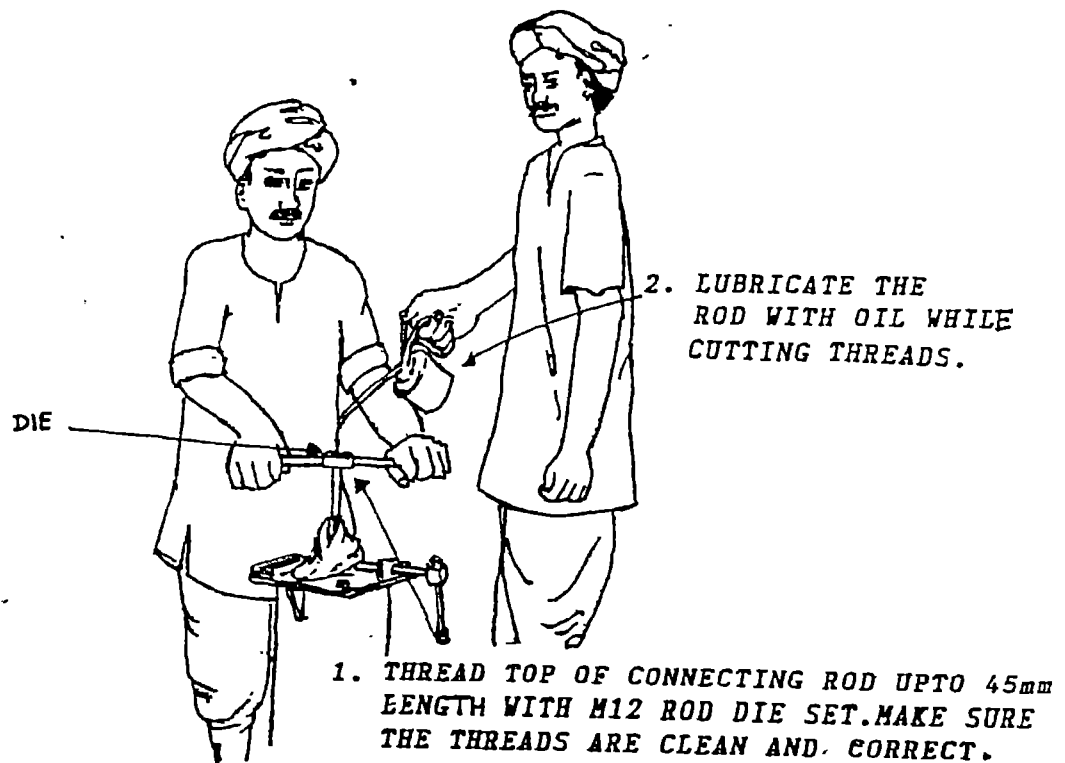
MAKE THREADS ON THE TOP MOST END.
